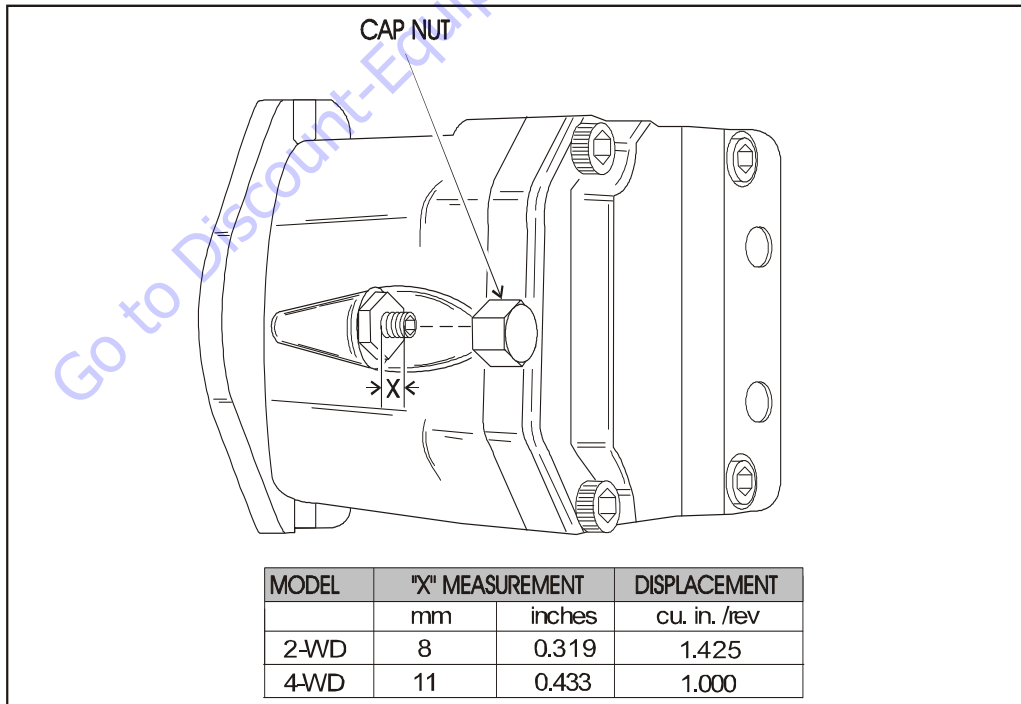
Drive Motor Adjustment (Prior to S/N 0300083332)
